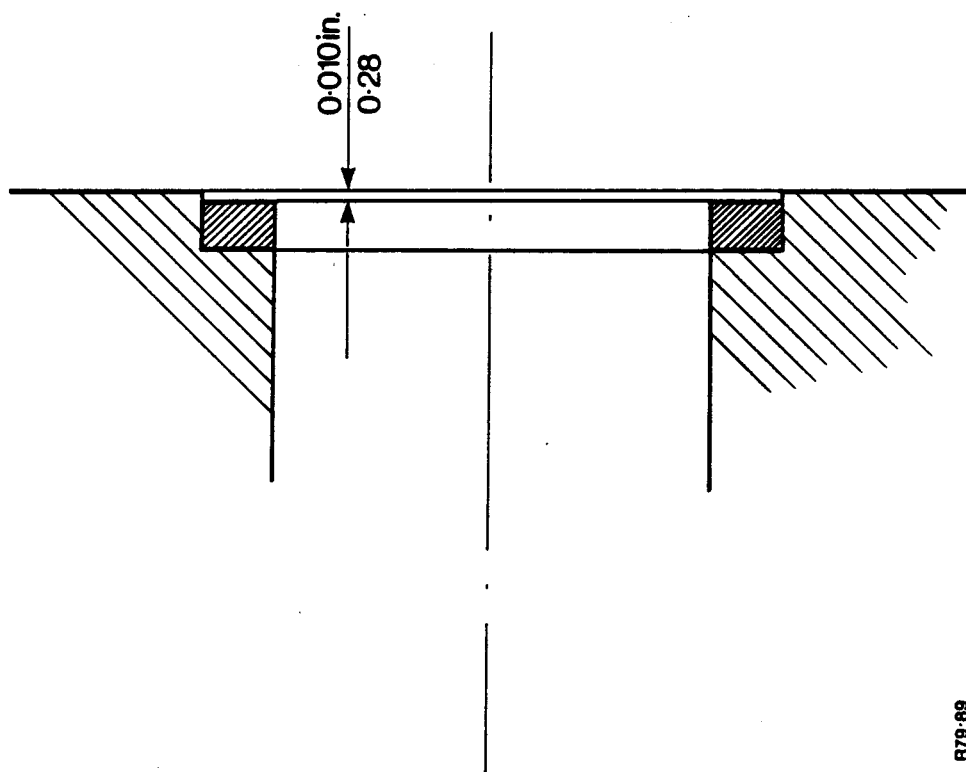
DIMENSIONS OF BORES FOR VALVE SEAT INSERTS
